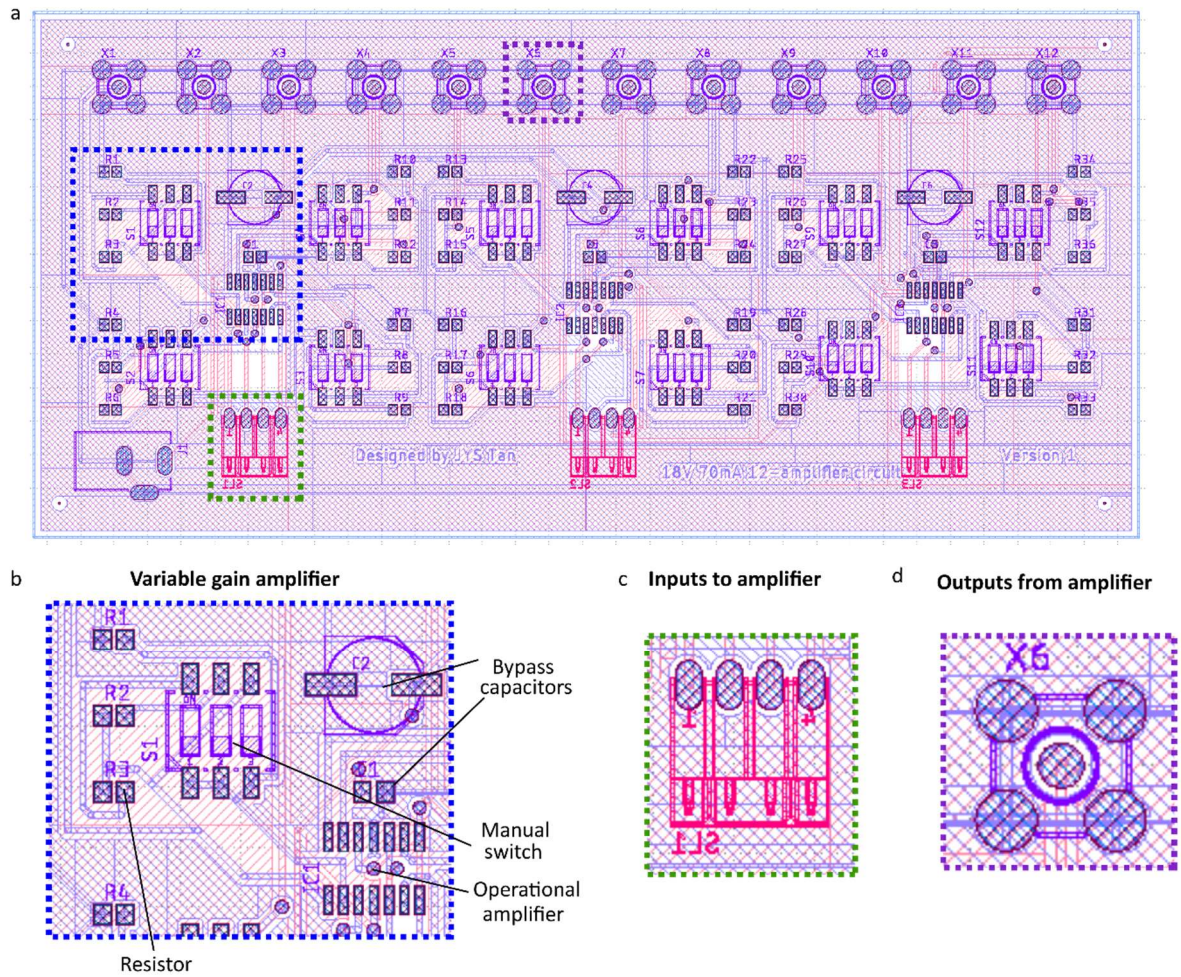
PCB layout design. a, Layout design transferred from circuit design in Fig. 6.5 - optimised using automation software. b-d, Zoomed-in view of the layout main components.
